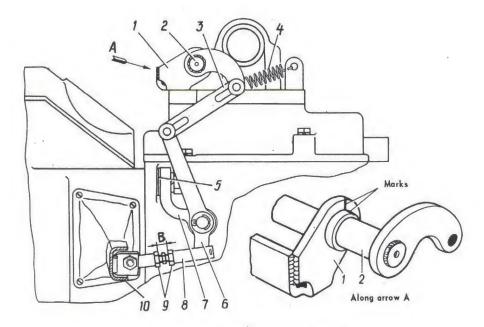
GEARBOX INTERLOCKING MECHANISM
